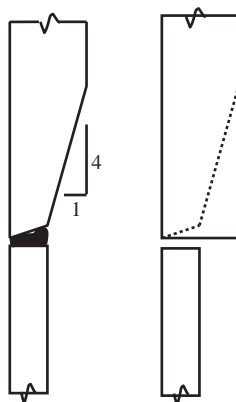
Grinding or machine tapering of the steel plate for welding penetration.
